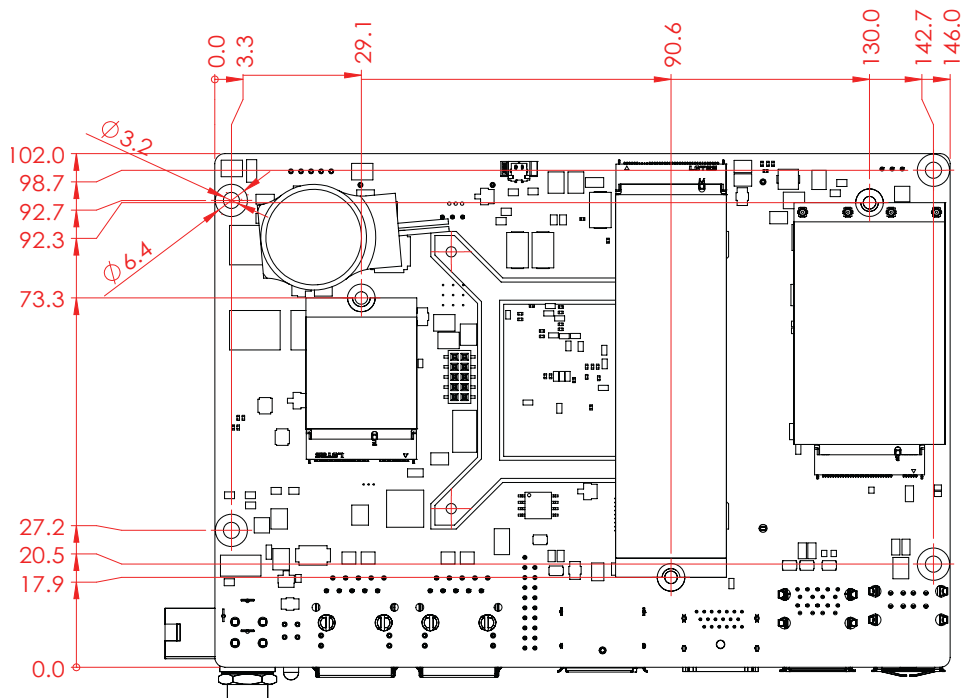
MIO-5154 Mechanical Drawing (Bottom Side)
